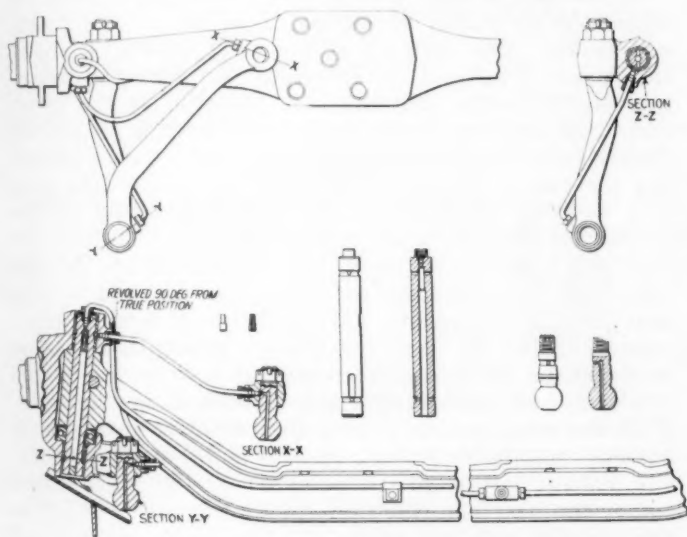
DETAILS OF A FRONT-AXLE ASSEMBLY
